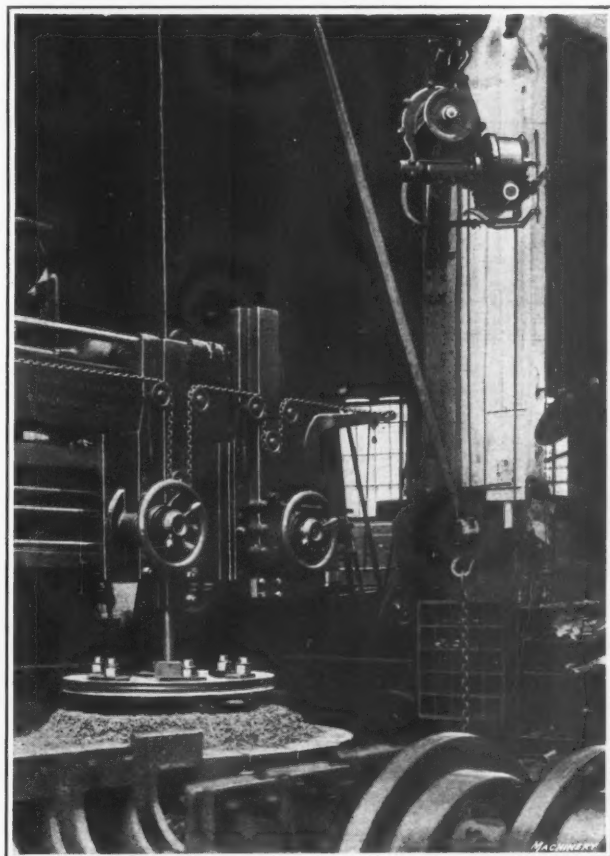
An "Imperial" pneumatic motor hoist built by Ingersoll Rand Co., New York City, is used to assist the operator in setting up heavy work on a turret lathe and to remove completed work from machine. Having an individual hoist for a machine avoids loss of time by the operator and machine in waiting for assistance
